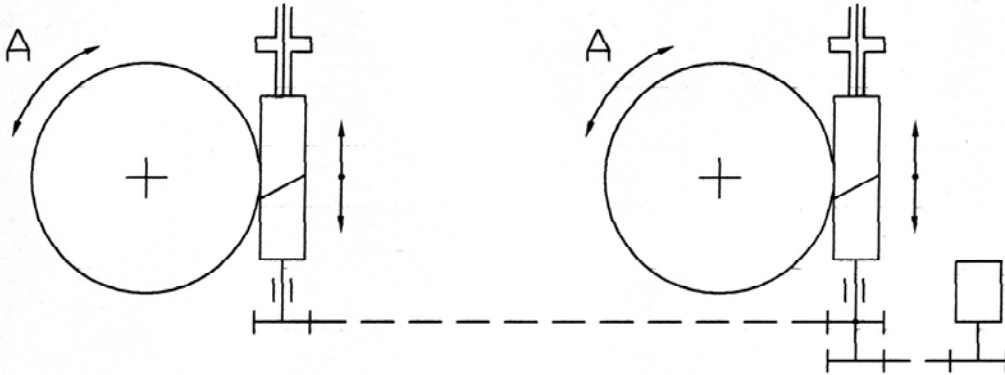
Tilting axis A by double DUPLEX gear mechanism
